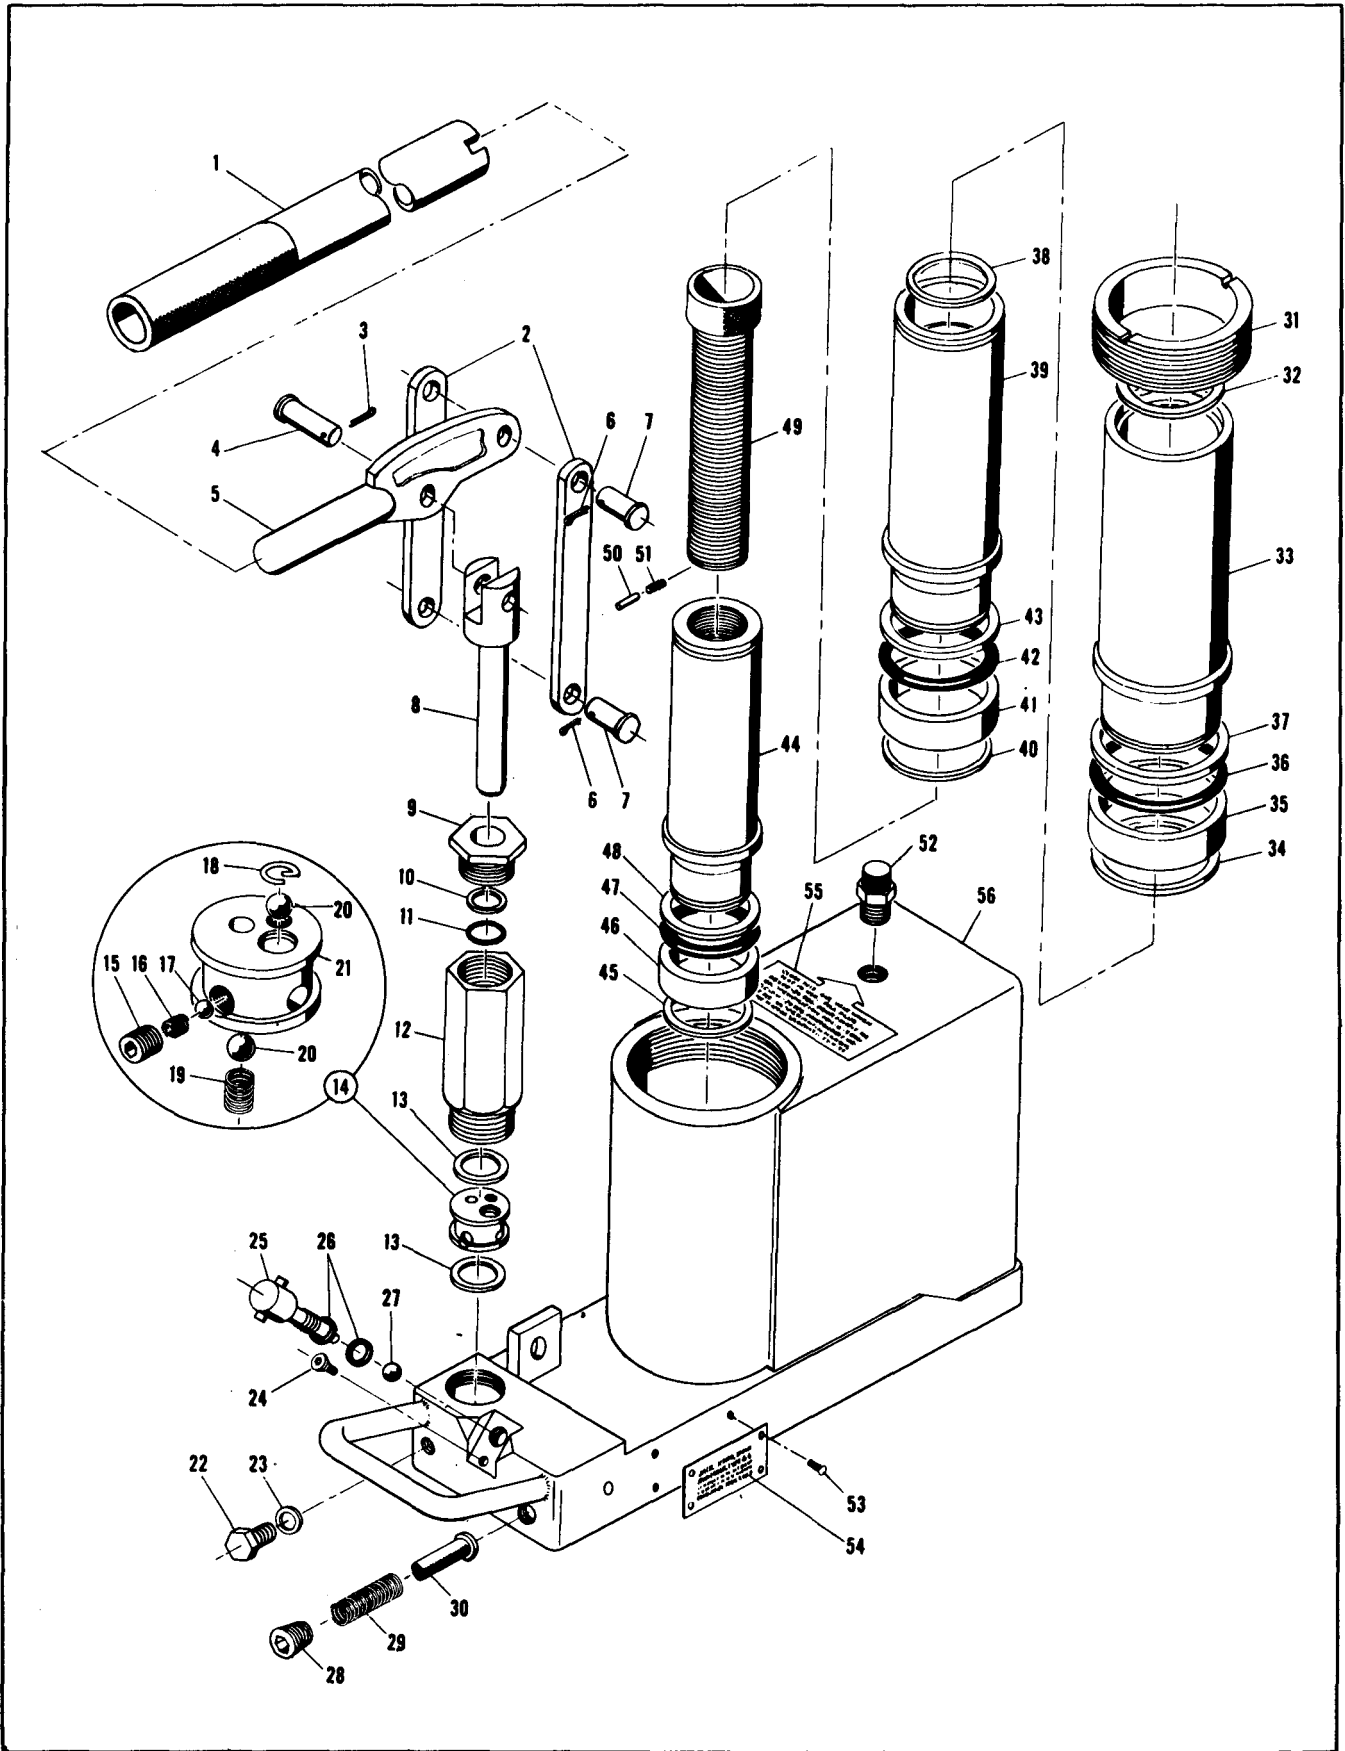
10-Ton Hydraulic Aircraft Hand Jack Assembly, Part No. 53D22004
